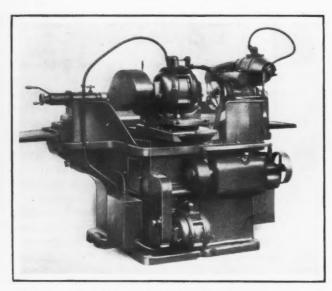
Rear View of Cincinnati Grinding Machine, Showing Arrangement of Motors
